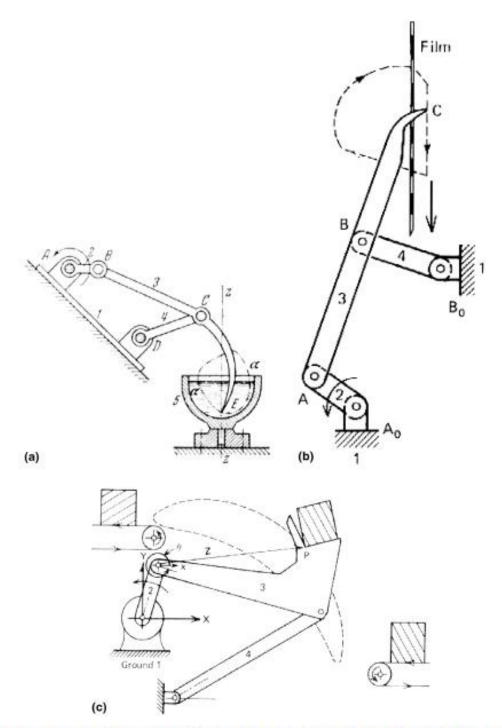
Industrial examples of path generators (four-bar linkage). (a) Kneading machine. (b) Film indexing mechanism. (c) Mechanism for assembling machine (cf. [9]).
